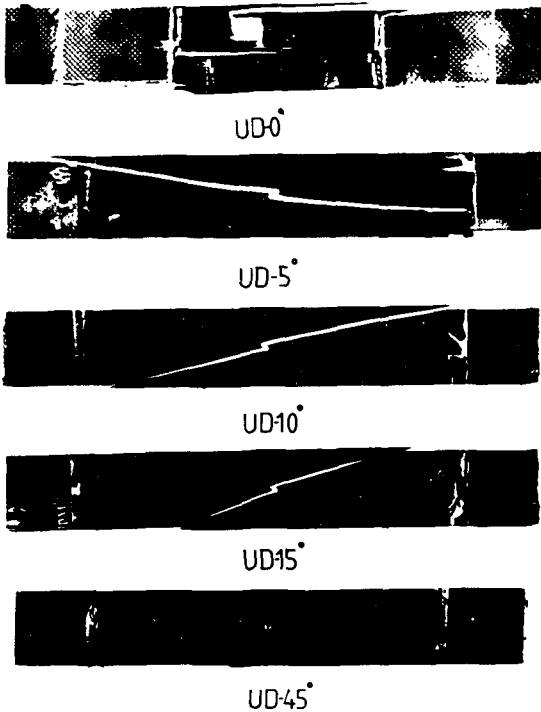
Fracture shape of unidirectional specimen after tensile test.
